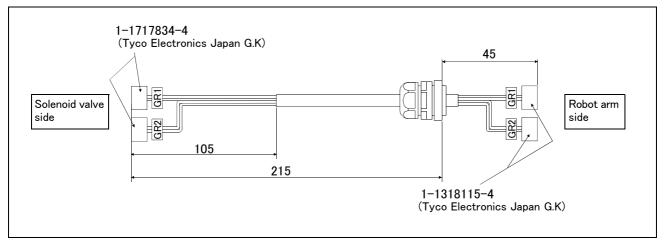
Outside dimensions of hand output junction cable (RH-12SQH/18SQH/20SQH series)
